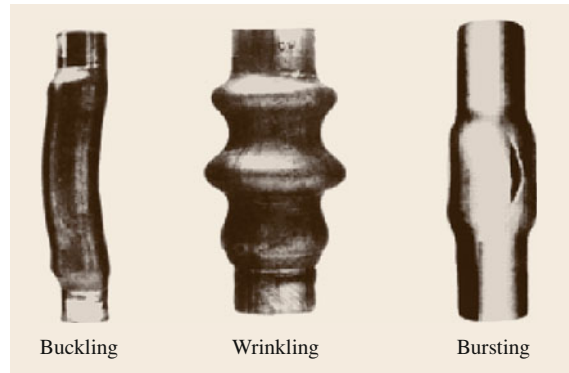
Failure modes in tube hydroforming (after [11.33])
